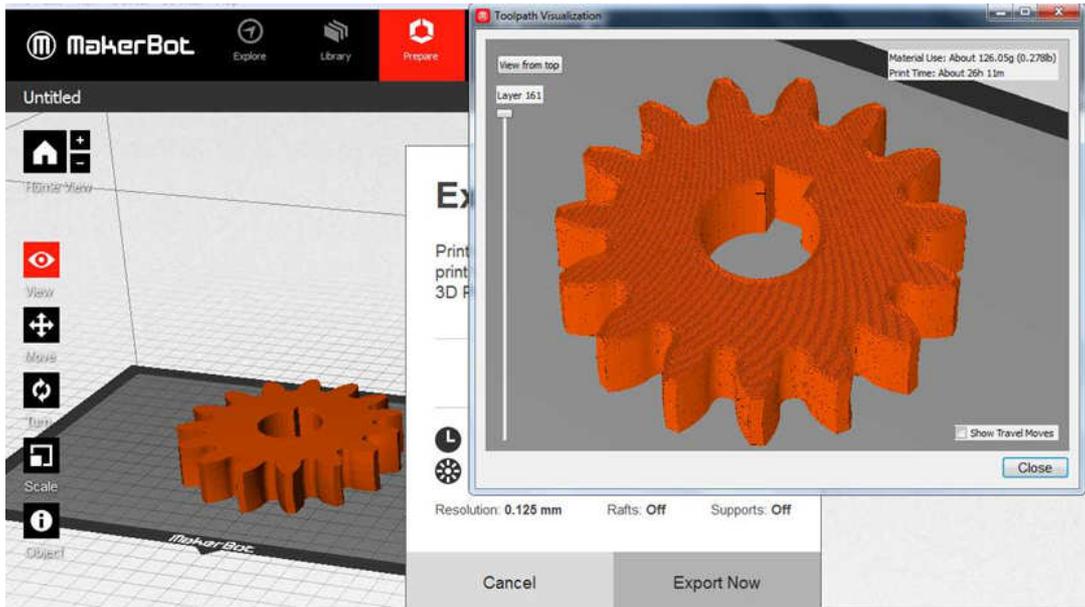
Slicing of the 3D gear model into layers and calculation of the head unit movements.
